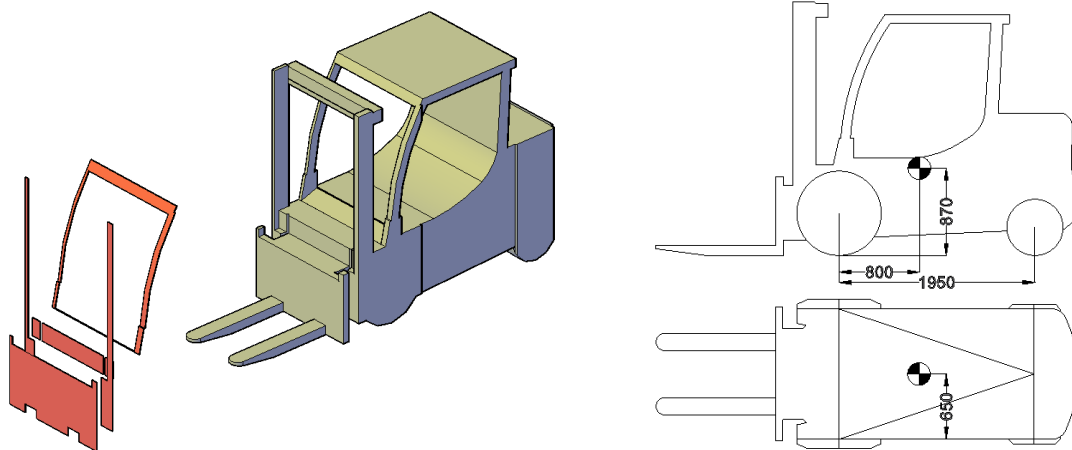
Carer R45NCF electric forklift 2D technical drawing & 3D model
